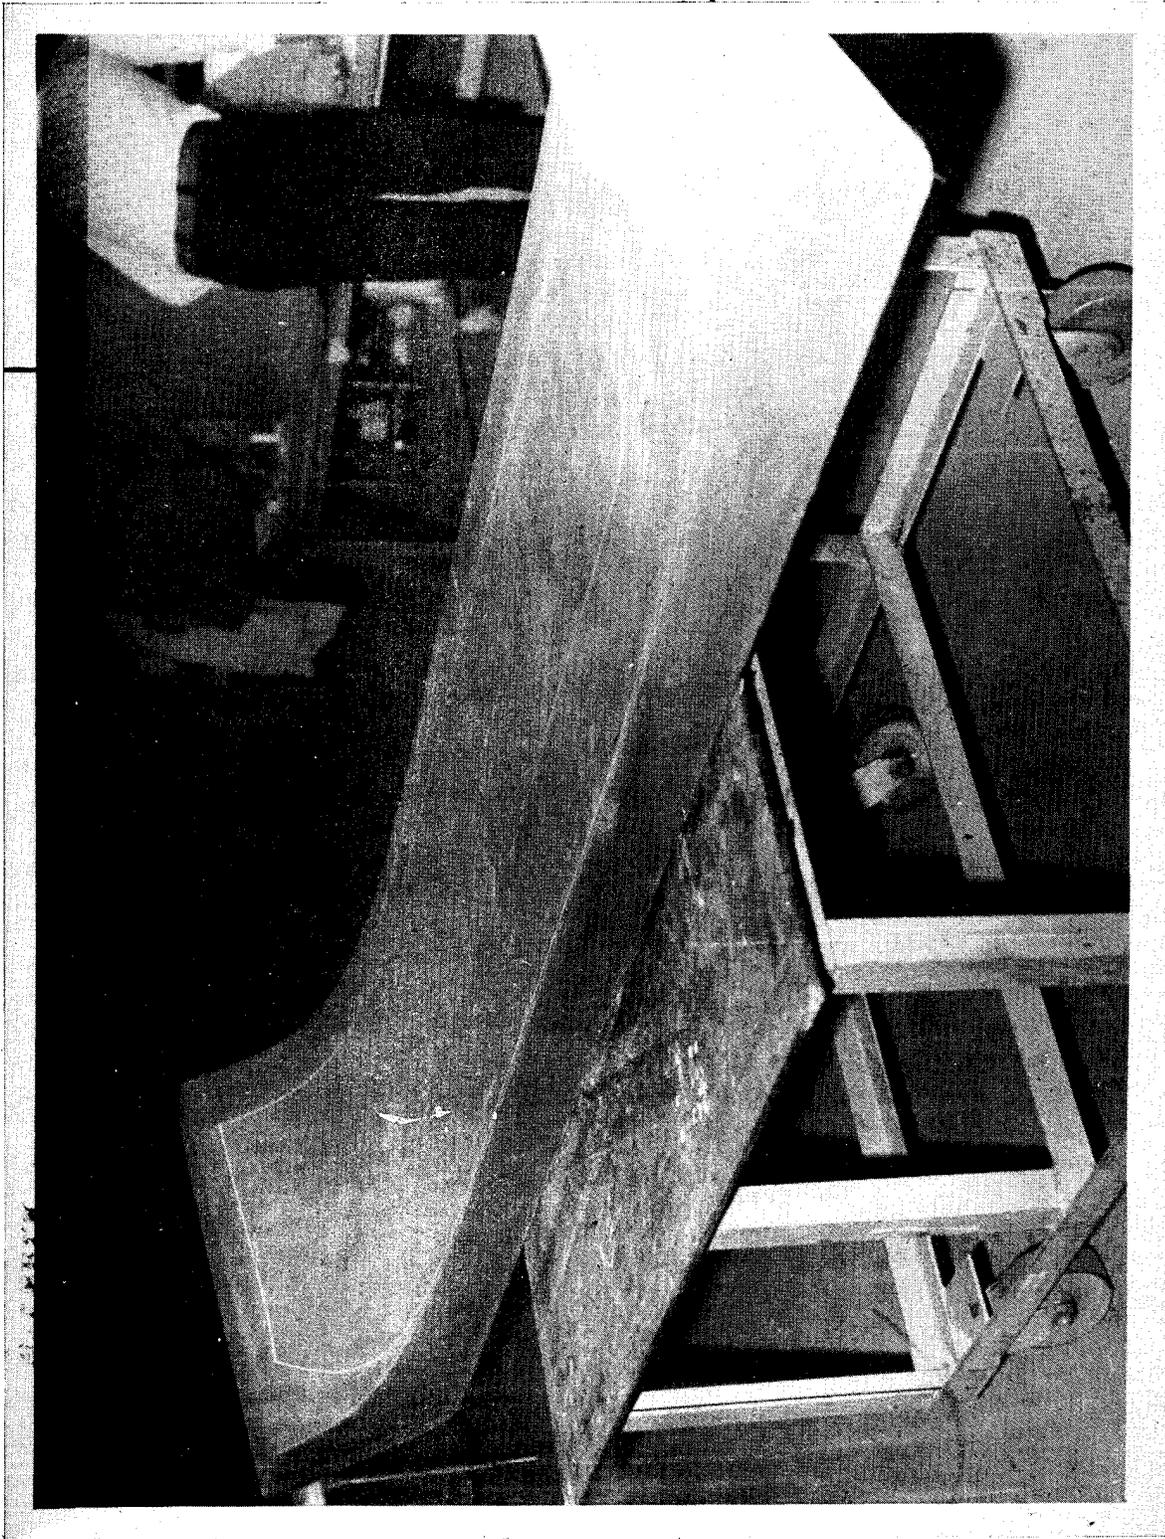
EPOXY MOLD FOR KEVLAR SKIN
